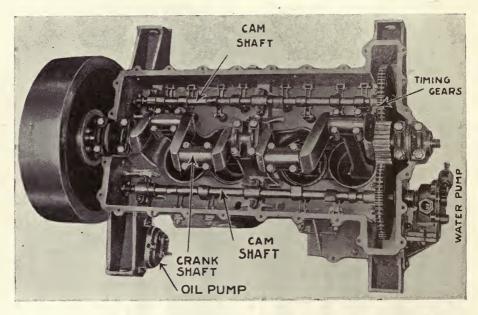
Bottom View of a T-Head Crank Case, Showing two Cam Shafts.
